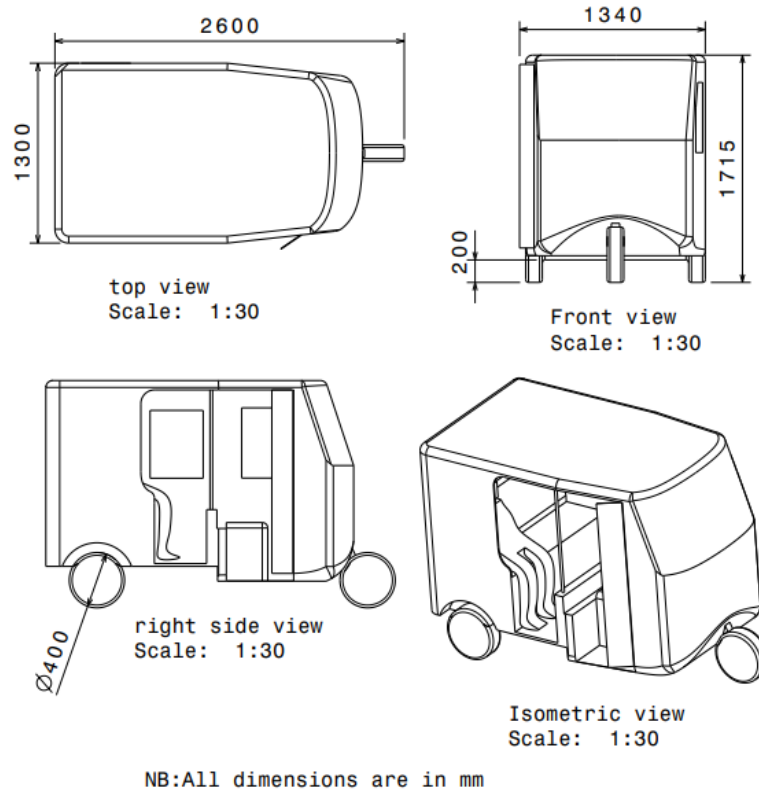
Drawing for wind deflector assembly with RE 4S Bajaj
